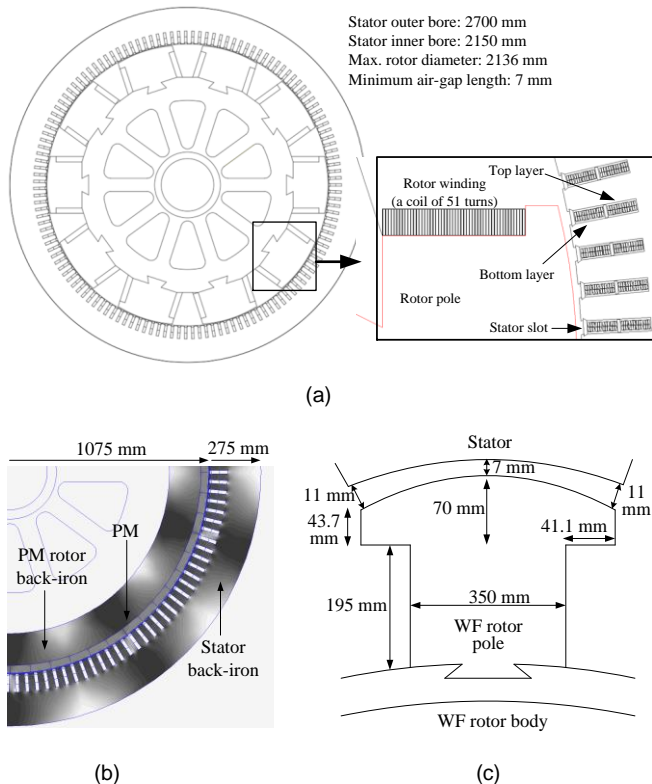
HG structure. (a) Machine cross-section viewed from WF side. (b) Machine cross-section viewed from PM side. (c) WF pole details.
